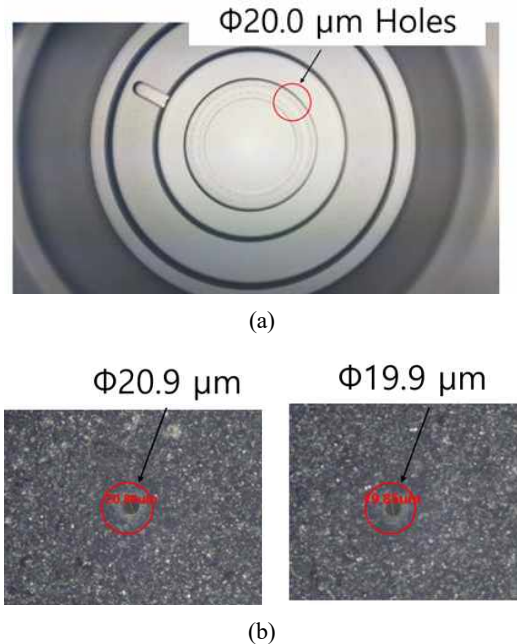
(a) Micro-machined holes in the quartz waveguide, and (b) microscopies of holes with measured dimensions
